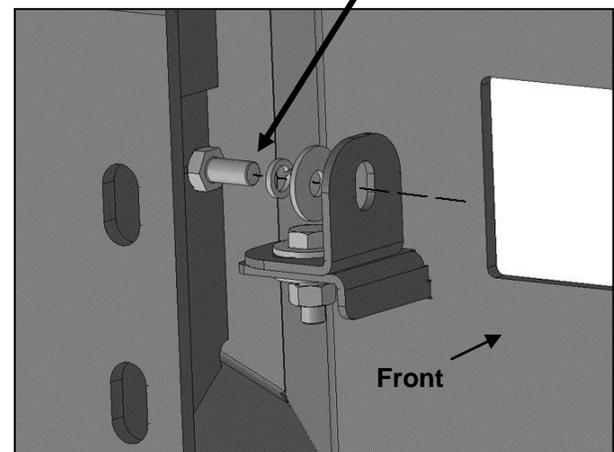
Attach "L" Bracket to mounting tabs on back of Bumper
